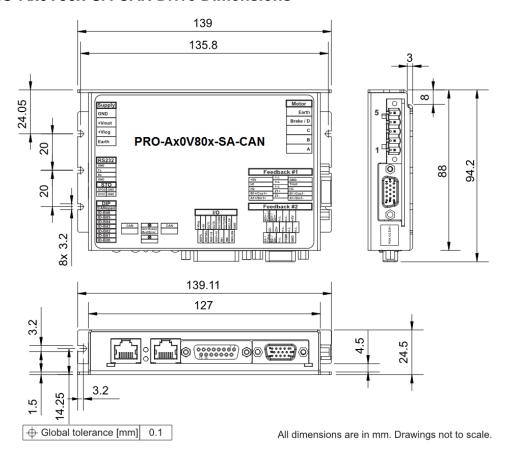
PRO-Ax0V80x-SA-CAN drive dimensions
